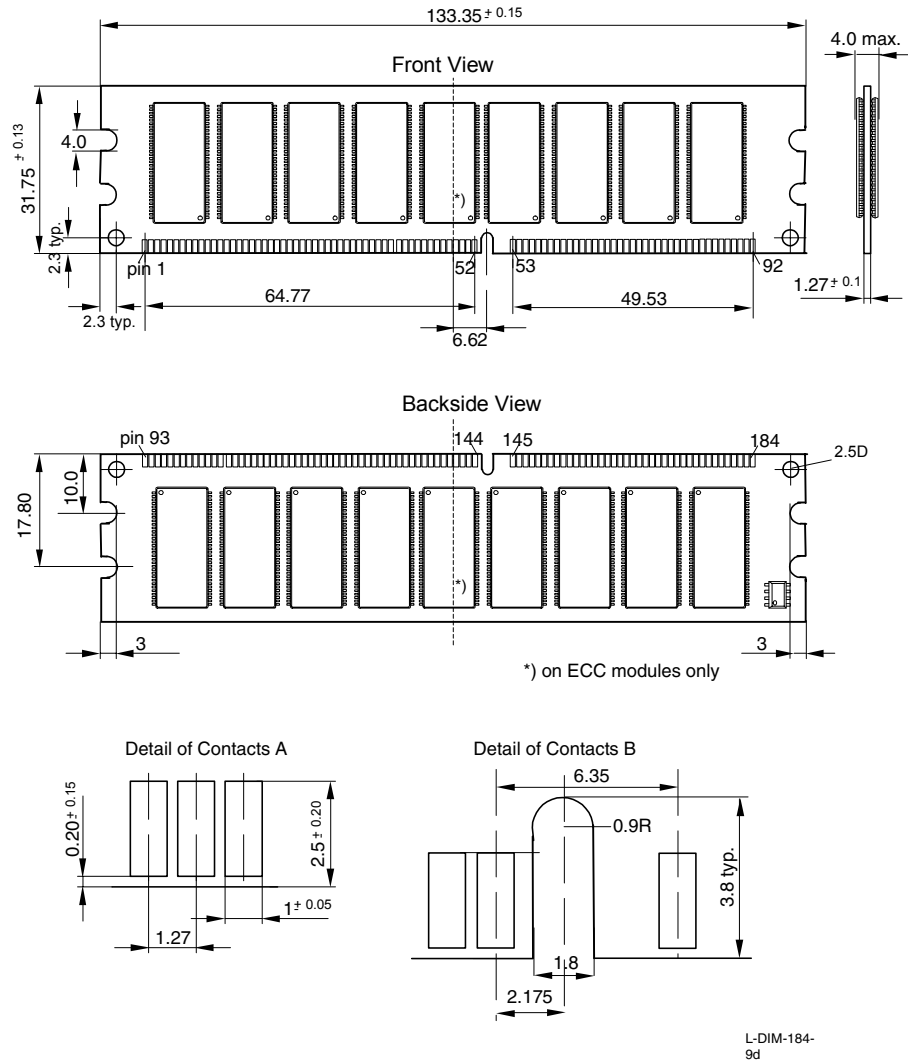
Package Outlines - Raw Card B1 (Two Rank Modules)
